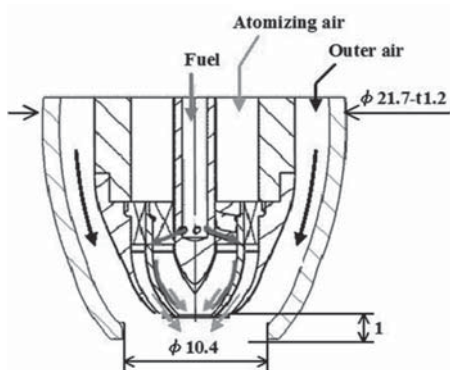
Schematic drawing of pre-filming type twin-fluid atomizer.
